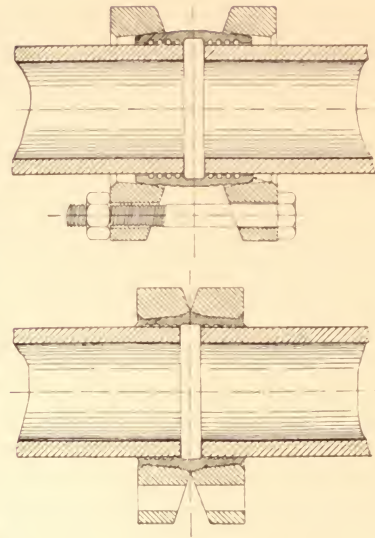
LONGITUDINAL SECTIONS OF THE FLEXIBLE LEAD JOINT BEFORE AND AFTER ASSEMBLY.
